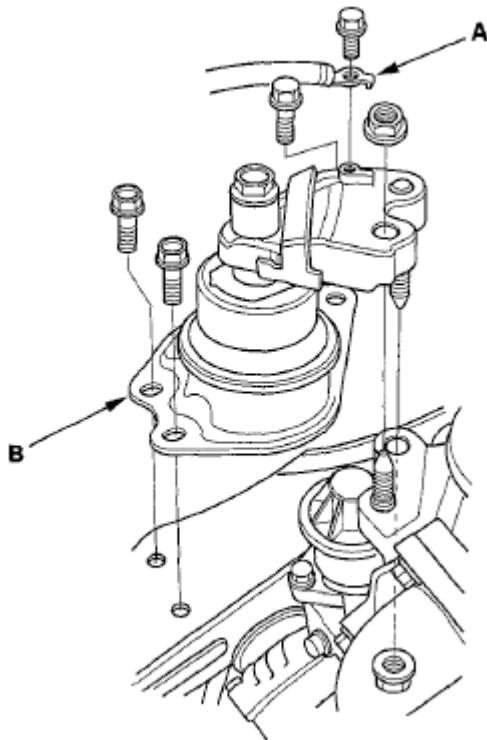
Identifying Ground Cable & Side Engine Mount/Bracket Assembly
